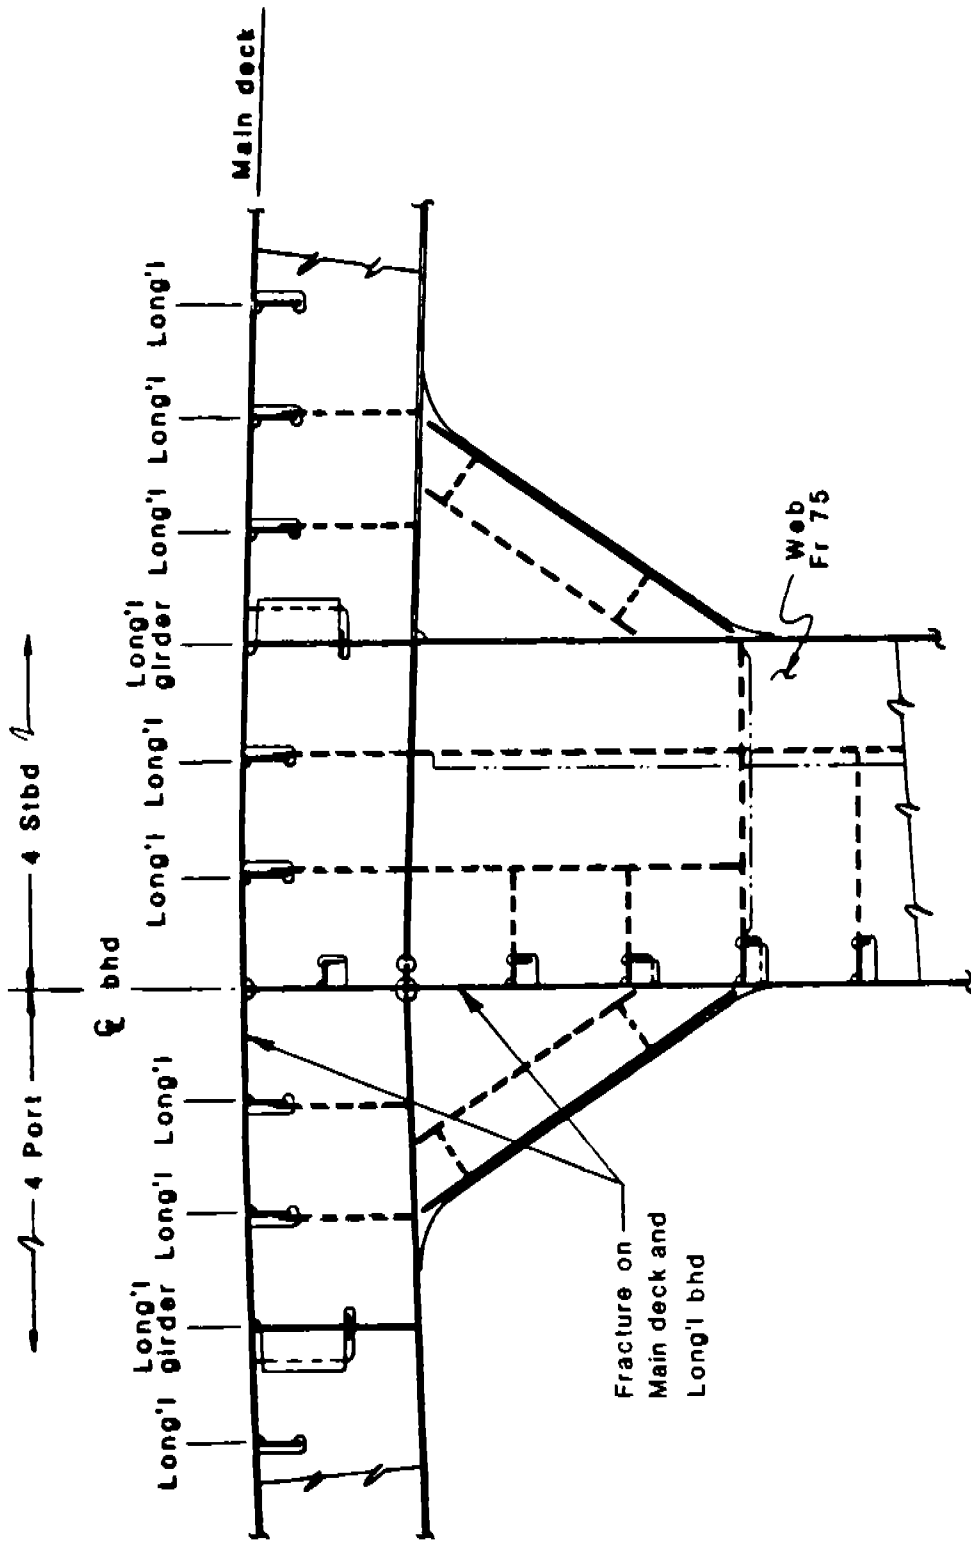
Structure of the Tanker With a Longitudinal Bulkhead Fracture
